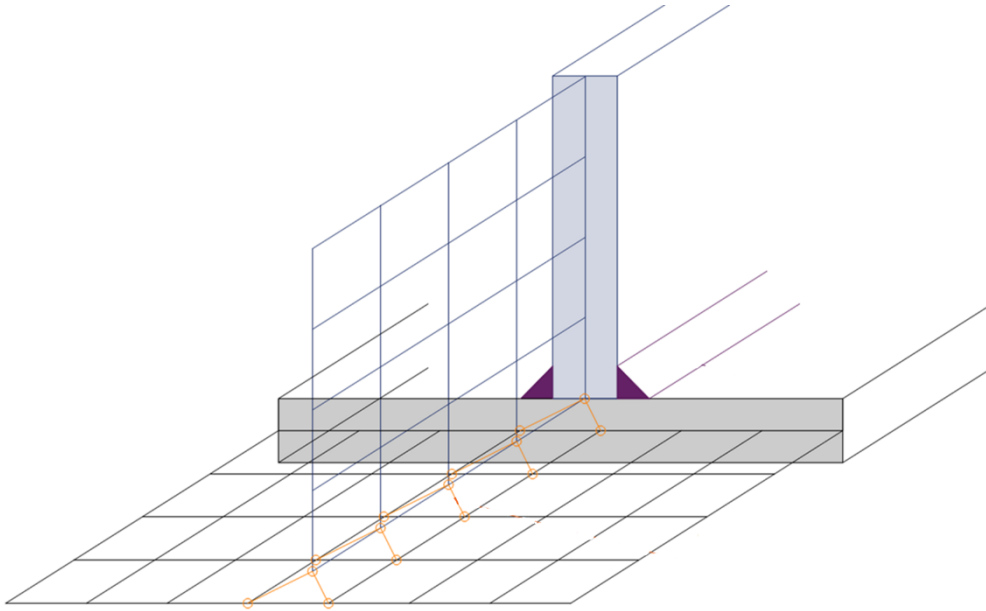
Example of FE modelling of a T joint between two thin-walled plates. (Source: [35])
